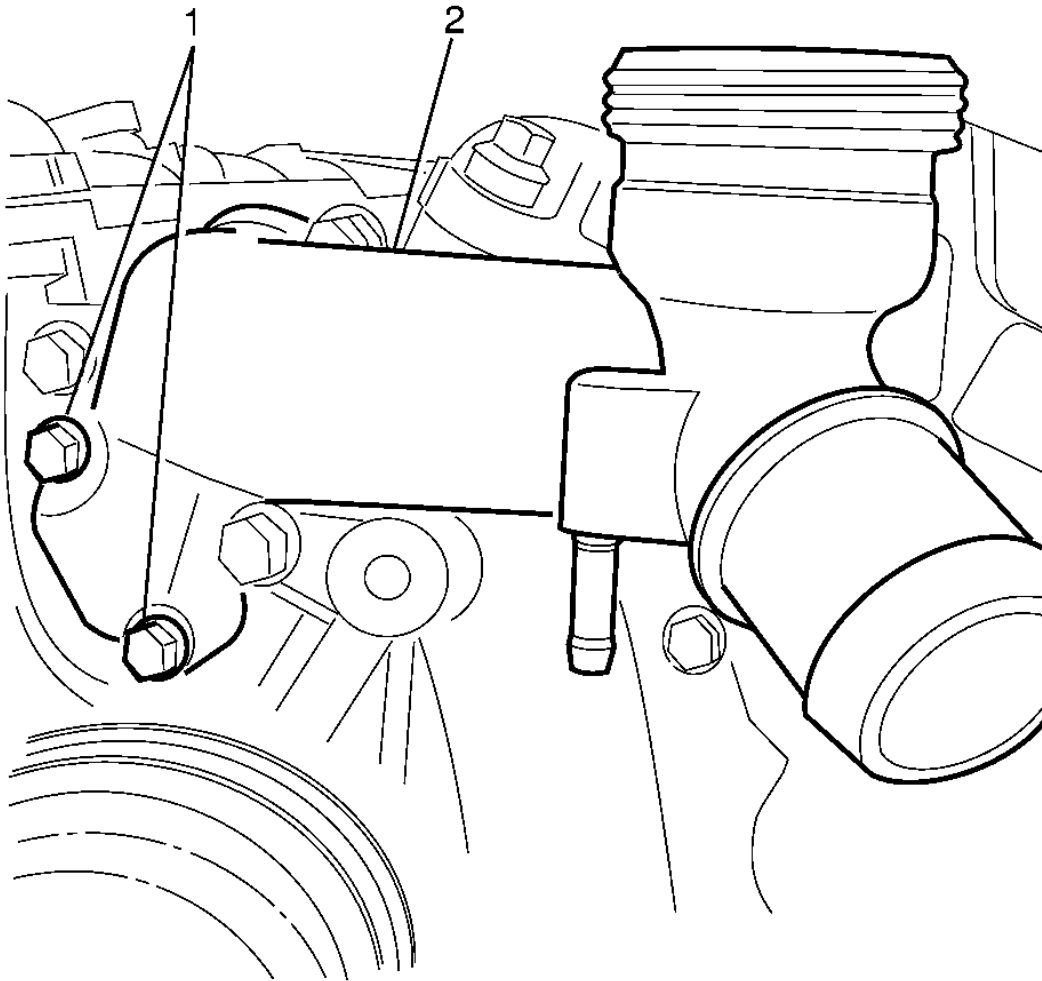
View Of Lower Intake Manifold Gasket
